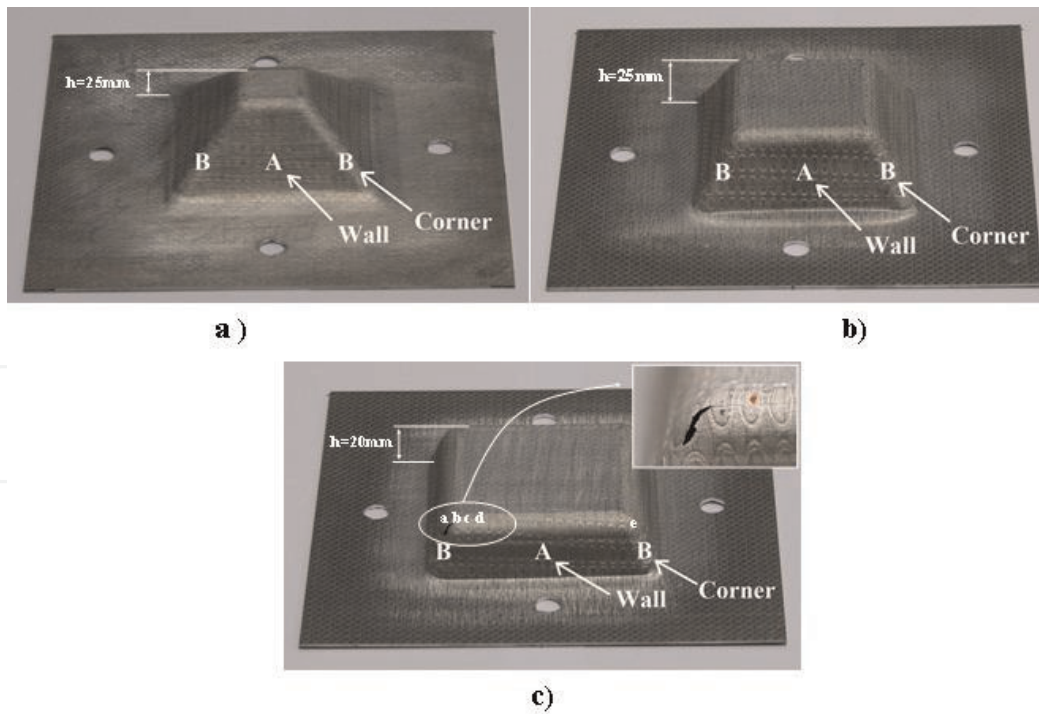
Square cups formed by rotational incremental sheet forming: (a) 45° wall angle, (b) 60° wall angle, and (c) 70° wall angle at which point cracks occurred [7].
